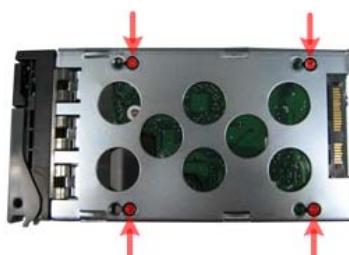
1U 10-Bay RBOD Drive Screw Locations
